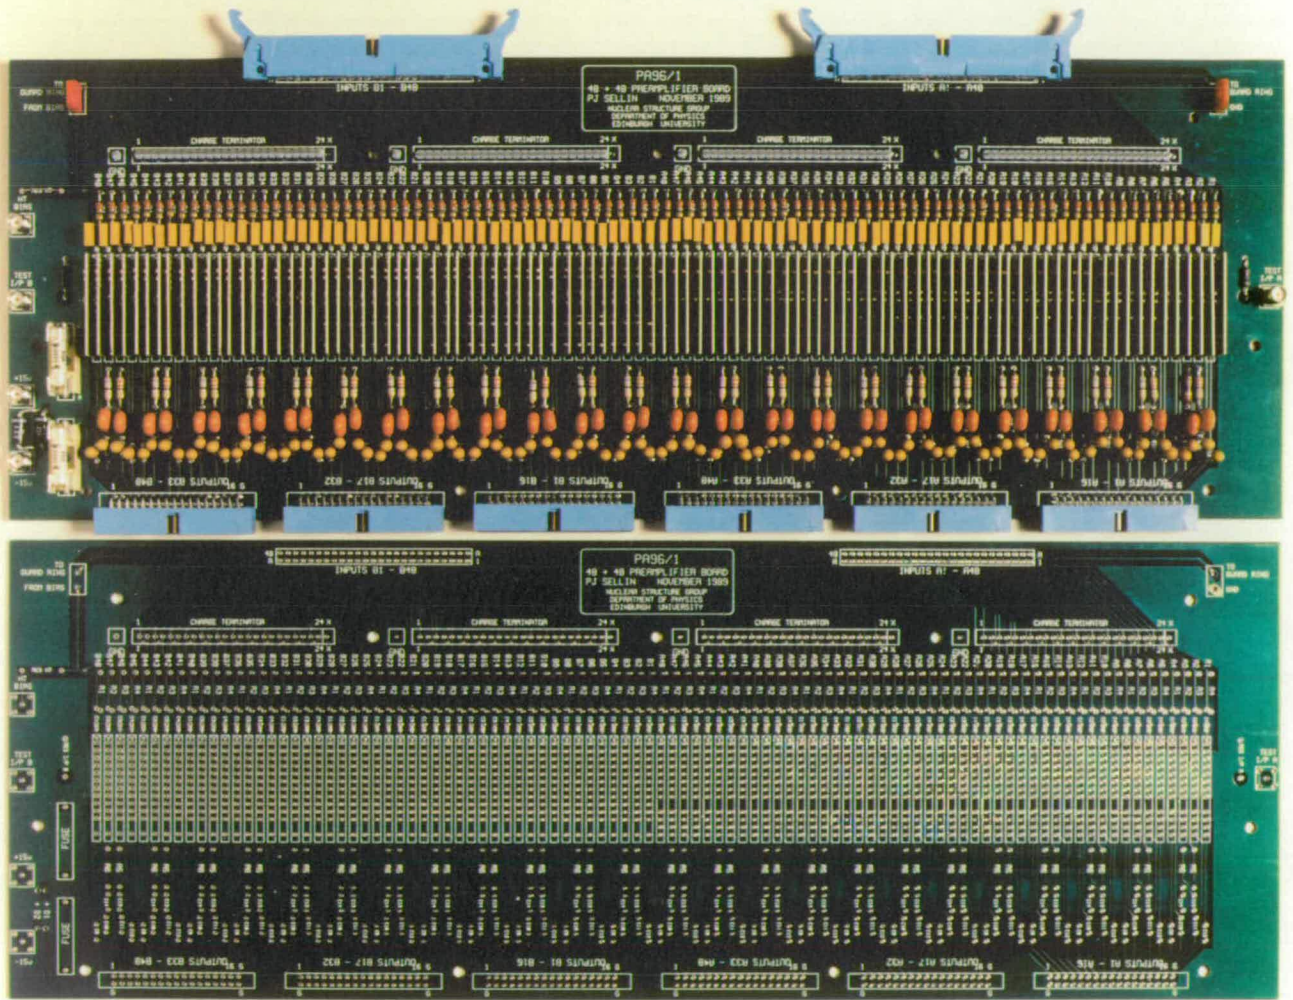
Photograph of the preamplifier printed circuit board showing (upper) the finished board, and (lower) the board without components
